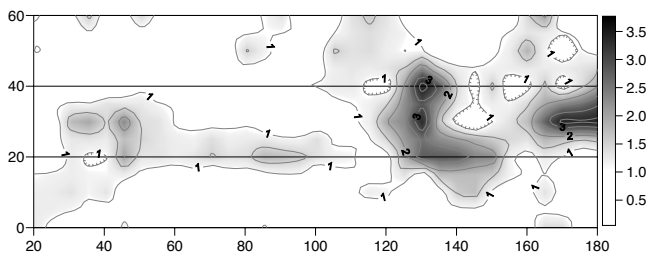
Magnetogram  $m - H_y$  of joint A, indications: 30 ~ 50 mm - SCZ coincides with the location of the occurrence of the defects of the weld seam; 120 ~ 150 mm - SCZ partly coincides with the location of the occurrence of the defects of the weld seam; the area of the largest values of  $m$  are probably the place of arc reignition, which may also suggest the occurrence of imperfections 517 or 601 according to standard EN ISO 5817; 160 ~ 180 mm - SCZ [32]
